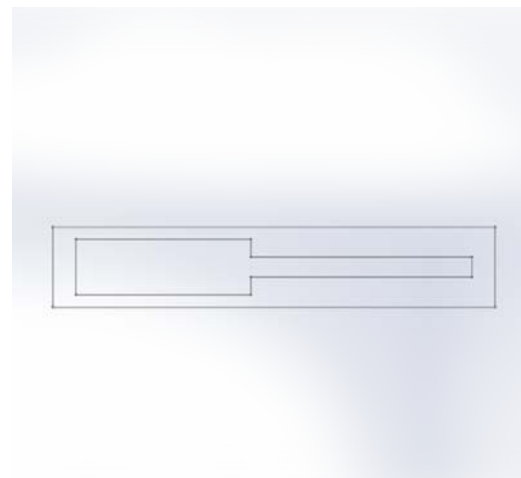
Pressure Dam Bearing Inner Diameter Layout
